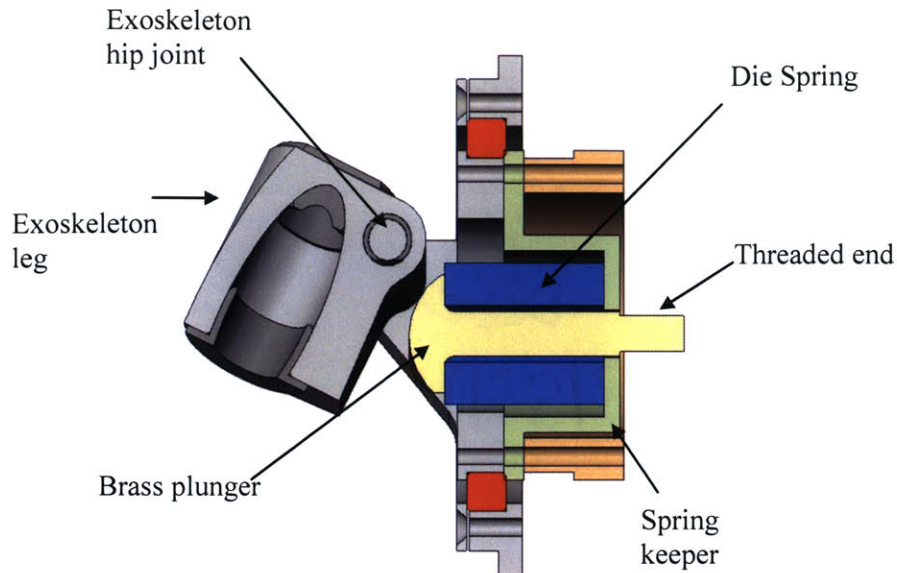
Section view of the adduction spring assembly at the hip joint.
